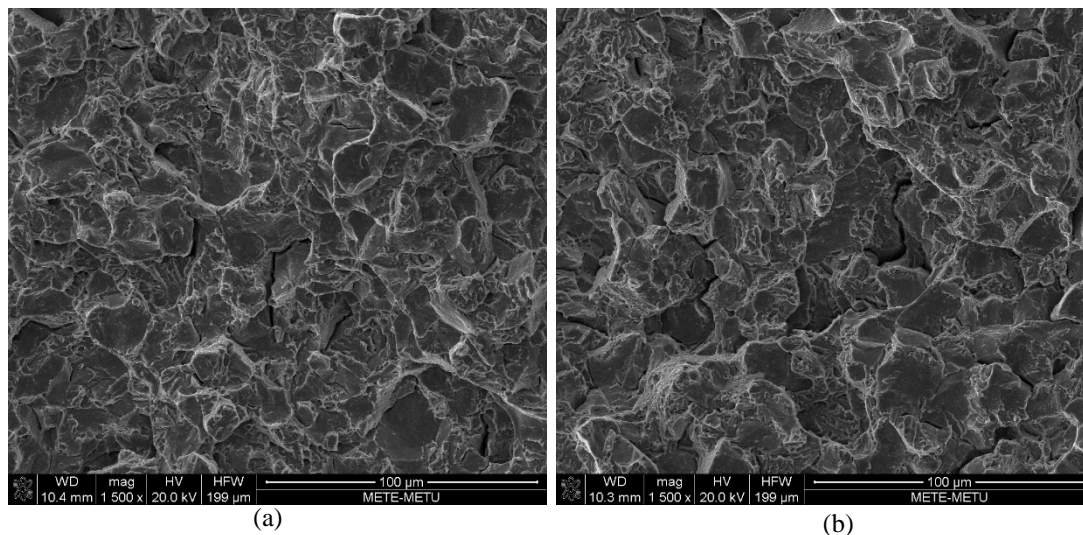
Fracture surfaces of the tensile test specimens of under M_s treatment at 240°C, 5hr.
